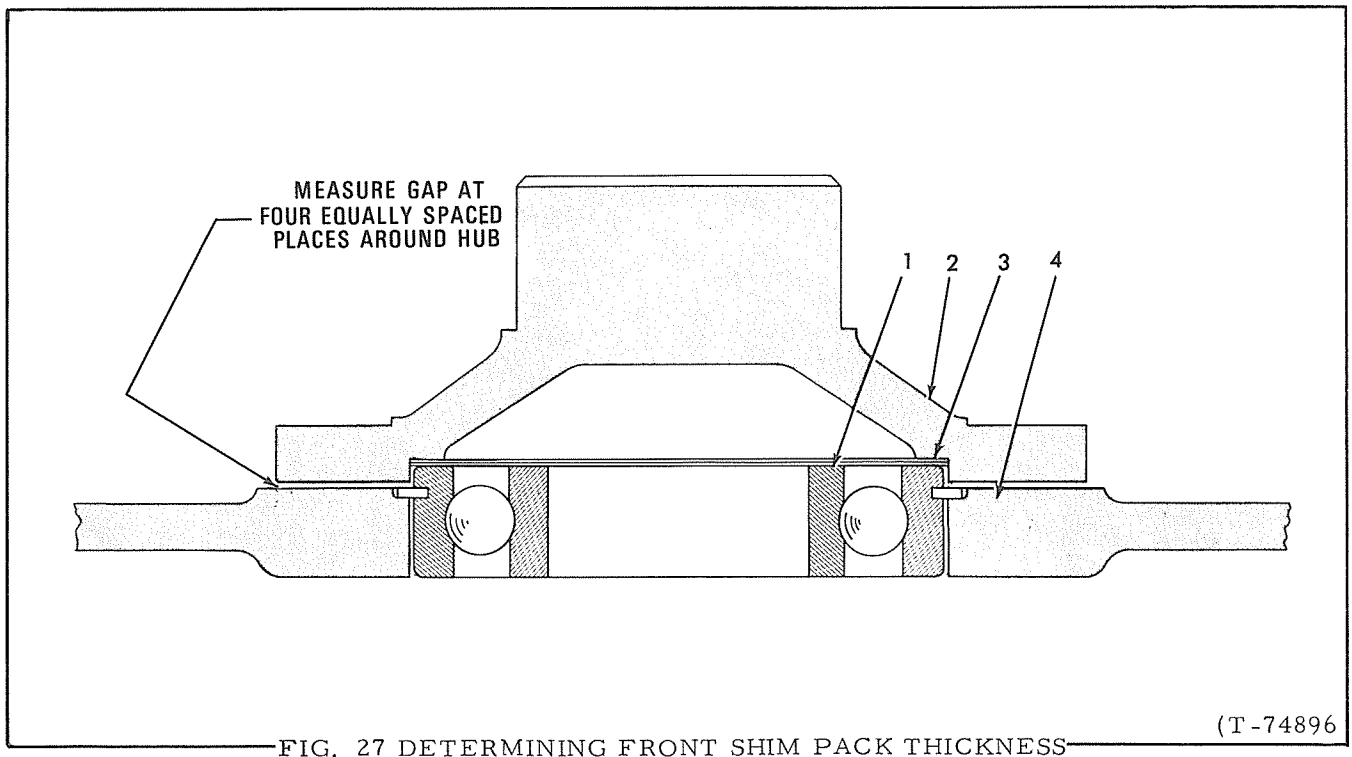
DETERMINING FRONT SHIM PACK THICKNESS
